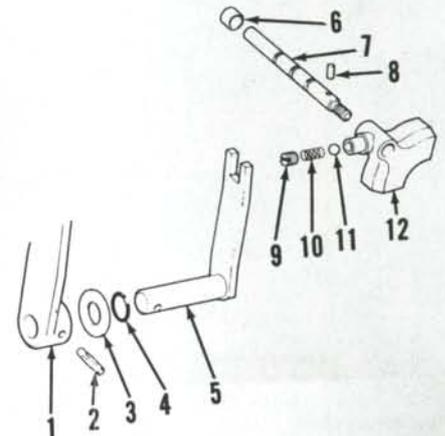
Exploded view of typical pto shift linkage. Some models use a retainer plate to secure shift rod (7) in place of pin (8).
